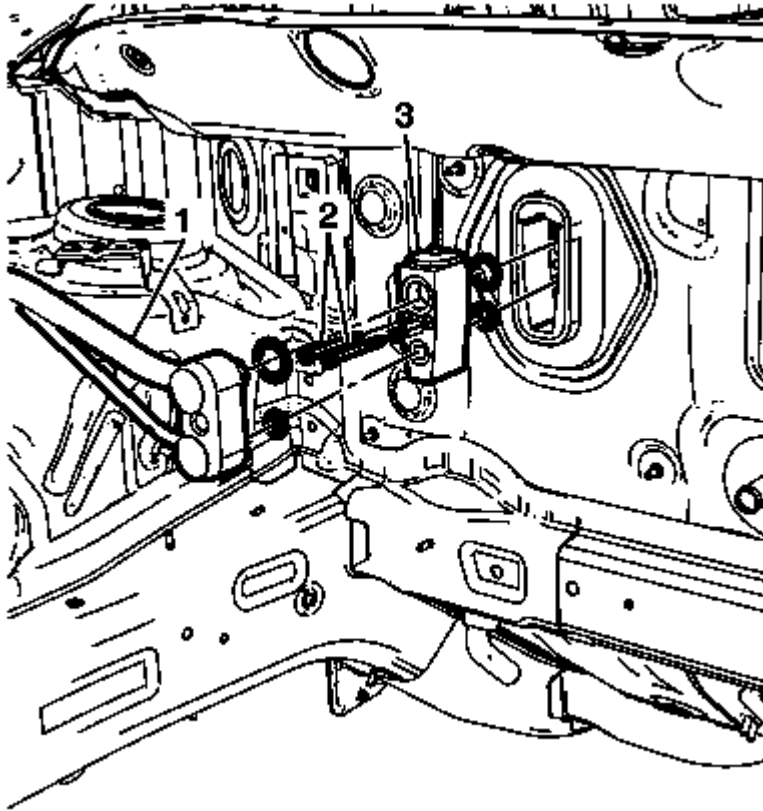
A/C Evaporator Hose And A/C Evaporator TXV
